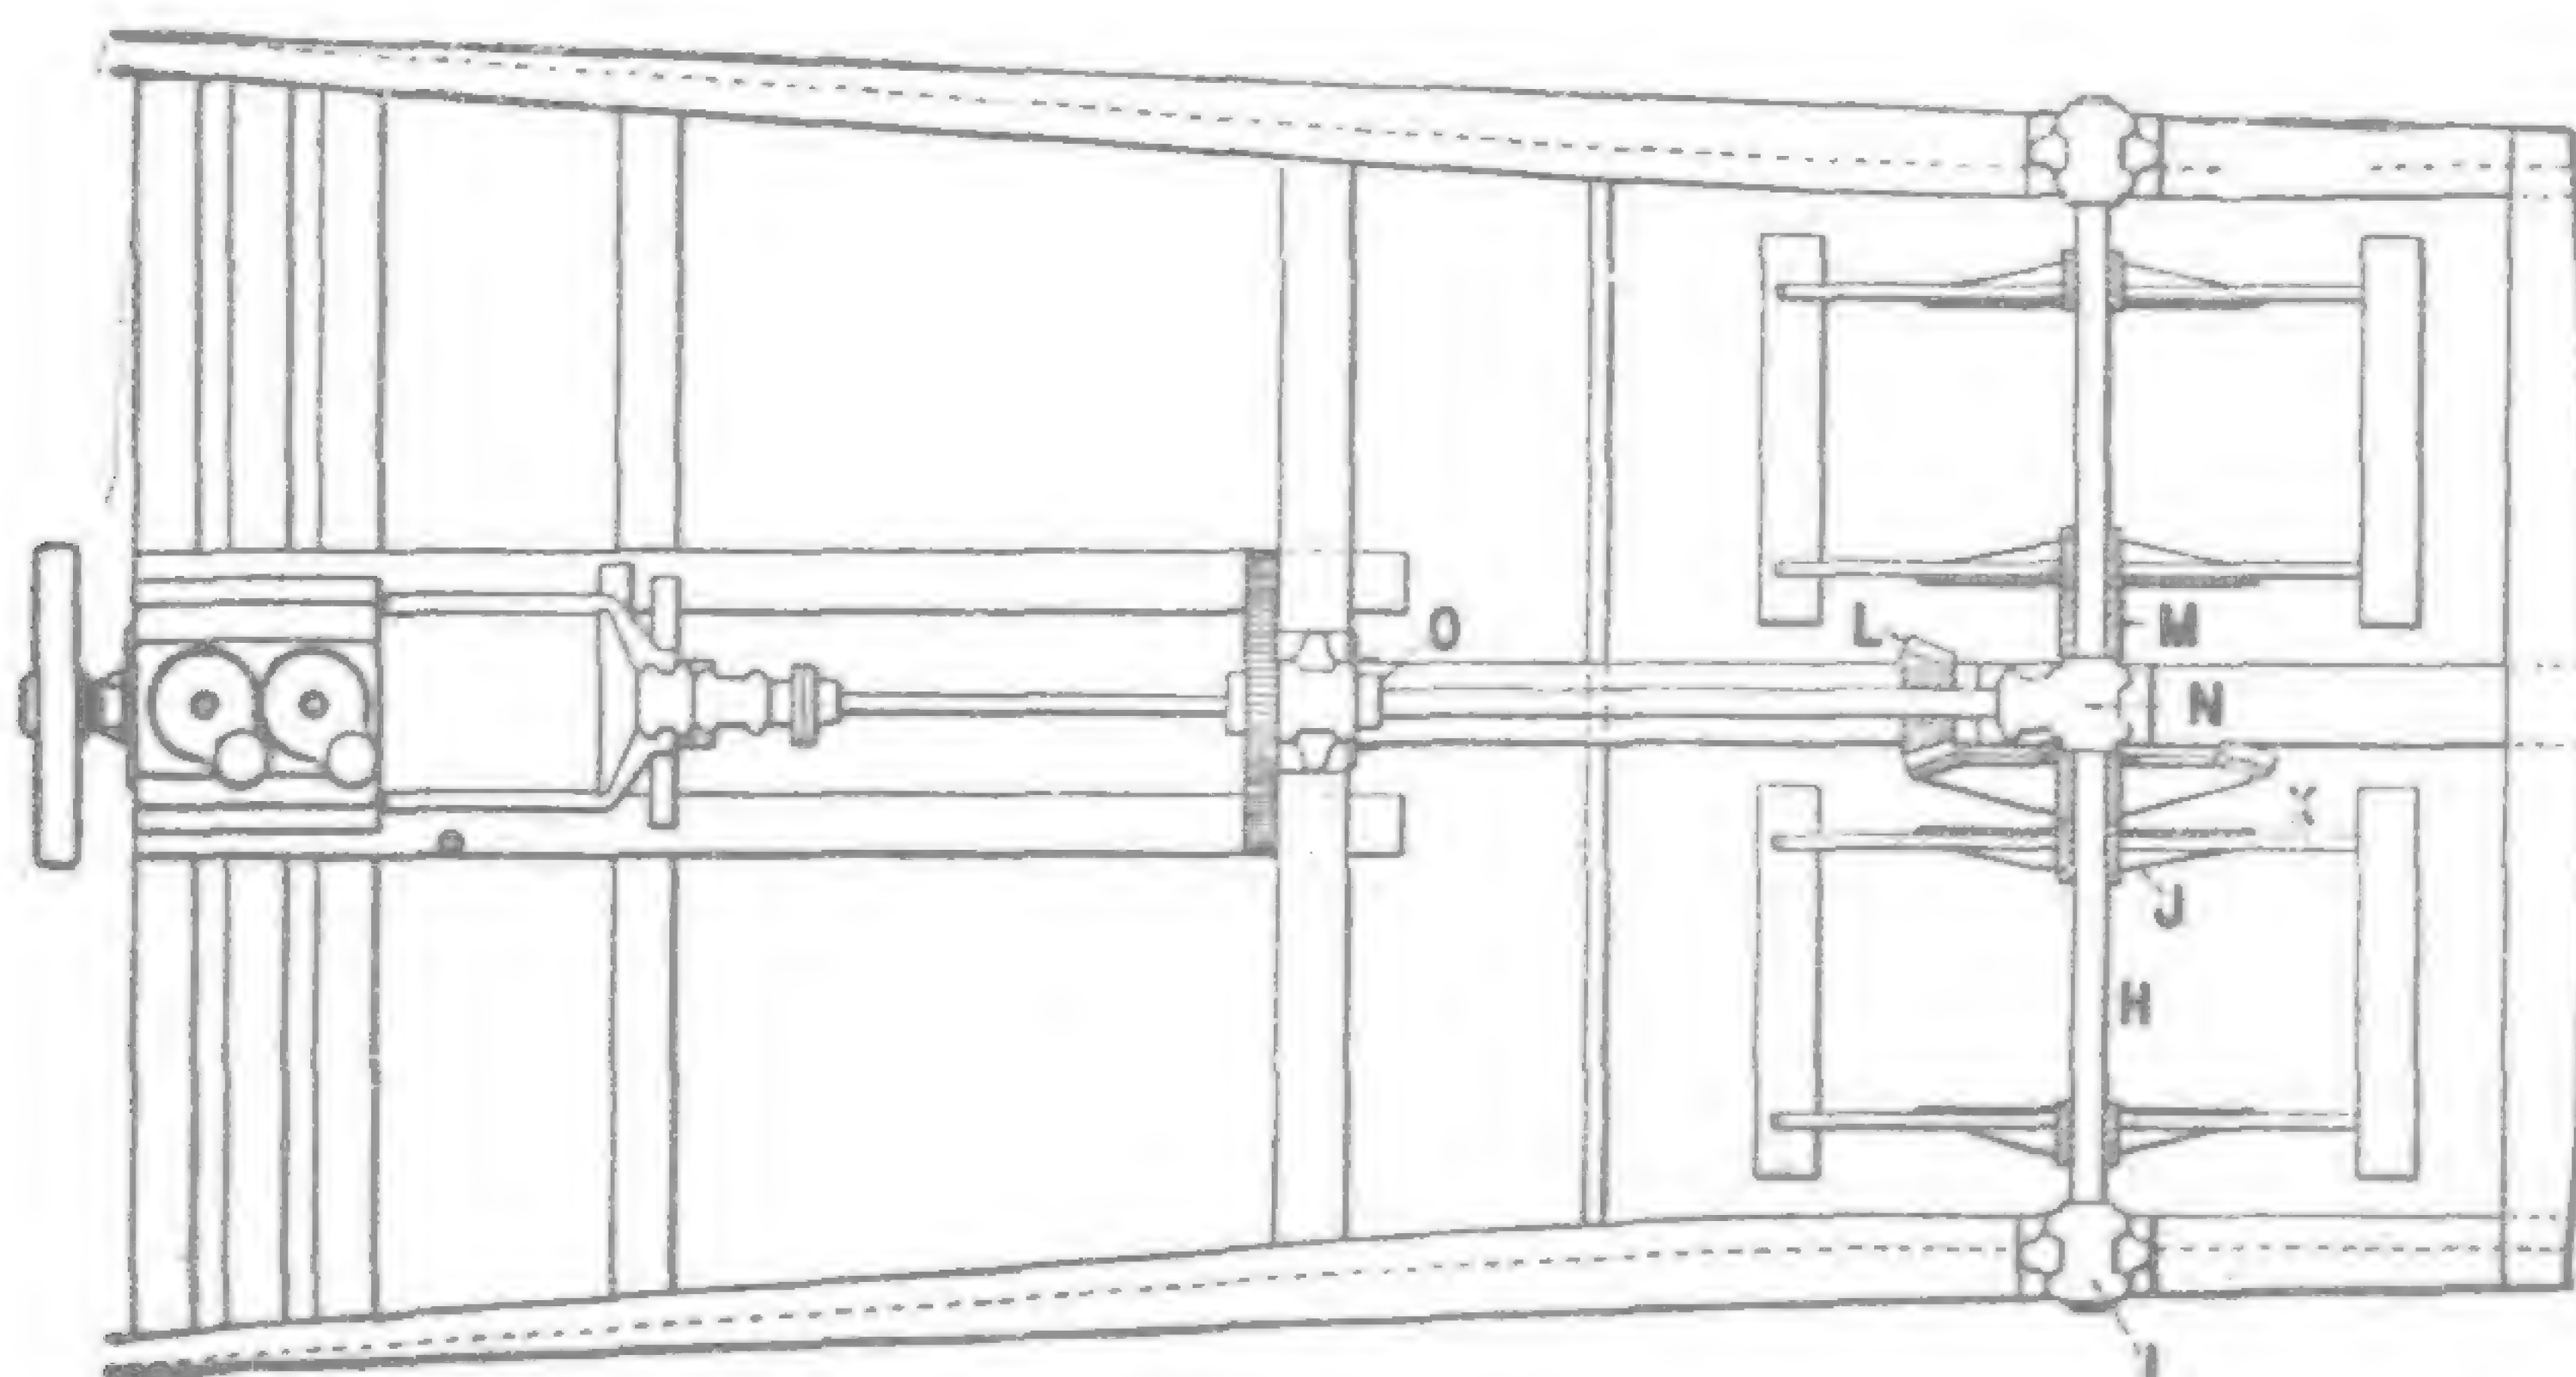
BEVEL GEAR STERN WHEEL DRIVE
